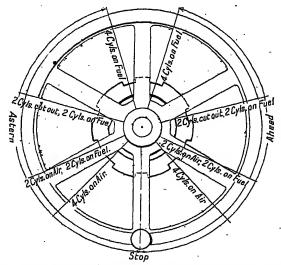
Manœuvring Wheel for Valve Gear of Type shown in Fig. 261.
